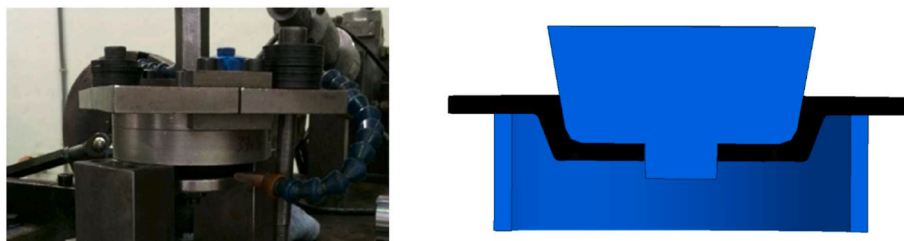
Image of axial tooling (left) and assembly scheme (right) for axial tests. The main dimensions of the developed tooling component is shown in Fig. 9.
